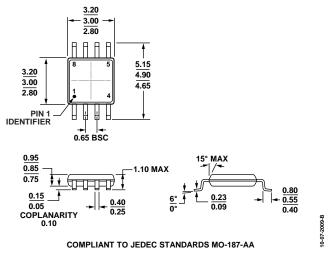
8-Lead Mini Small Outline Package [MSOP] (HRM-8-1) Dimensions shown in millimeters
